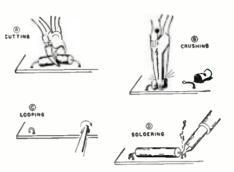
For replacing a board-mounted component, the manufacturer's suggestion works best: solder new part to loops made from the leads of the old part.
